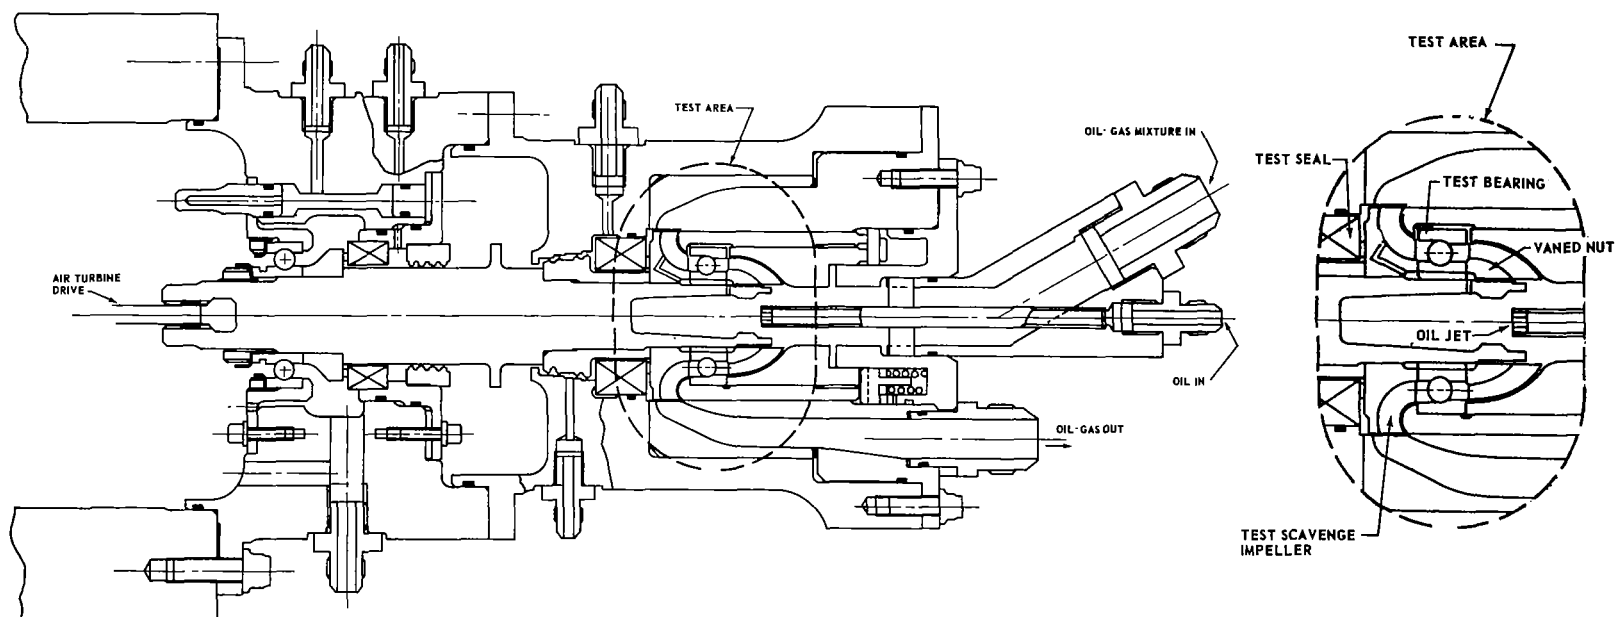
Turbine-Compressor Bearing Compartment Rig.
